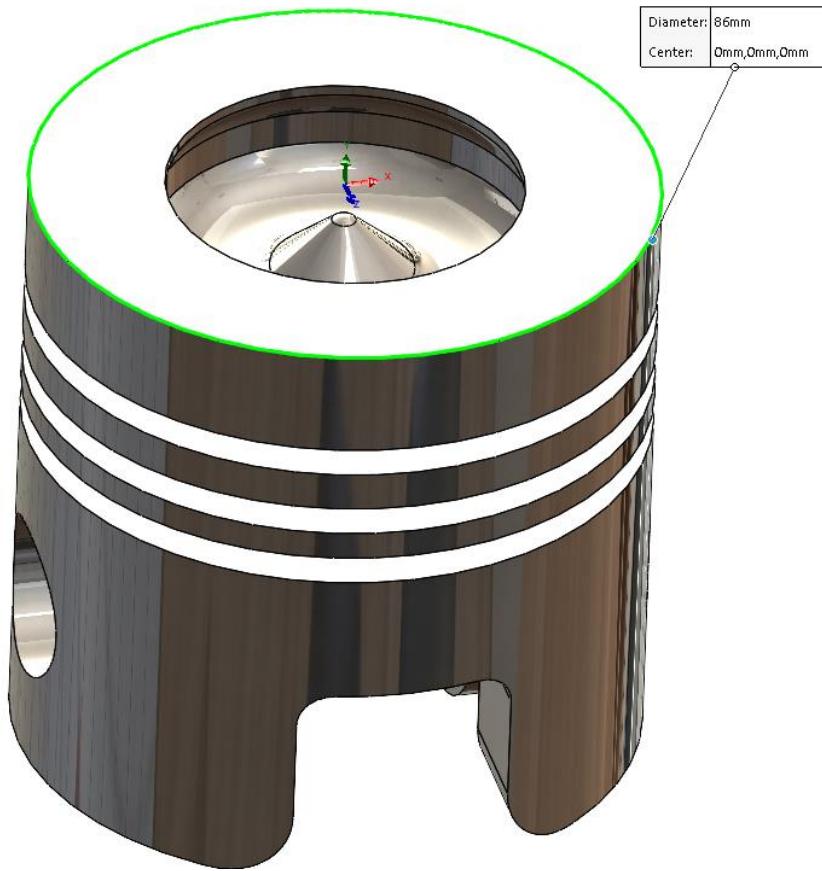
CAD and dimensions of the piston designed and to be optimized in 2024 year.
